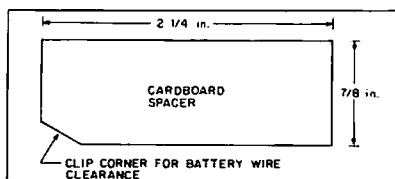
Cardboard spacer. Clip corner for battery wire clearance.
